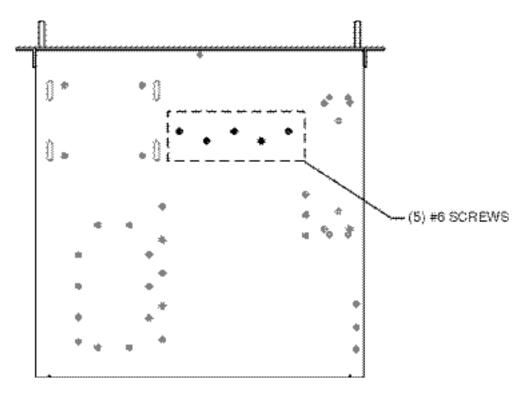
Backplane Bracket Location on Bottom Chassis
